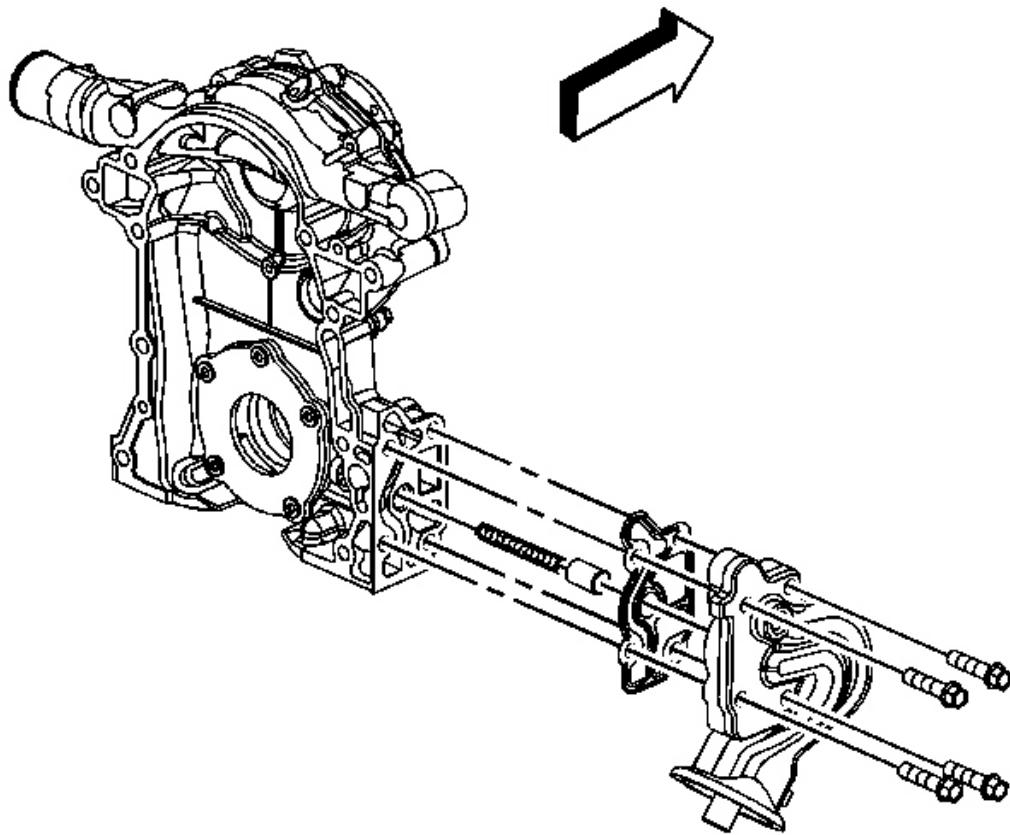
Identifying Oil Filter Adapter & Bolts
